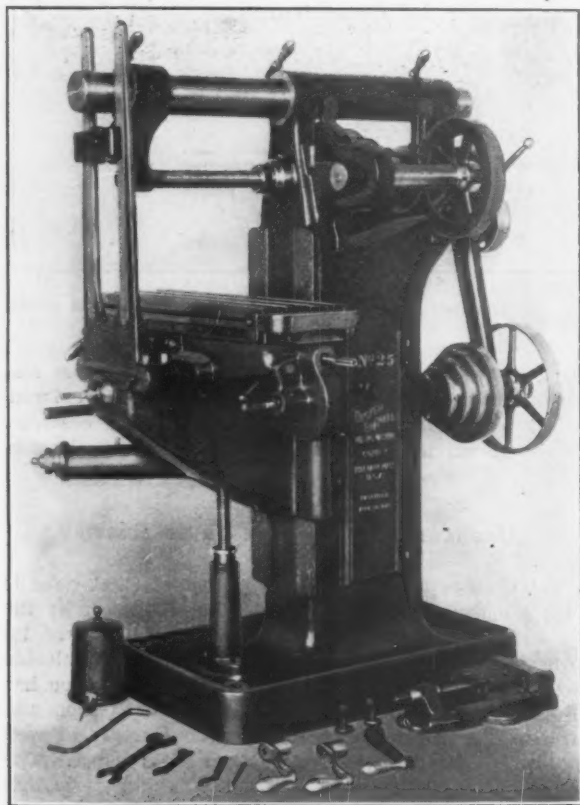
The No. 25 Plain Milling Machine of the Becker-Brainard Milling Machine Company, Hyde Park, Mass.
